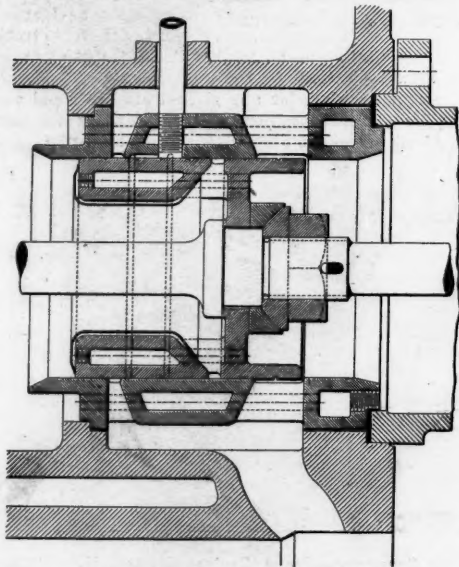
Cooled Valve and Heated Bushing Used on Superheated Steam Locomotives.
